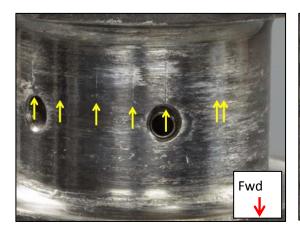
Longitudinal cracks present on fractured number three main journal.
